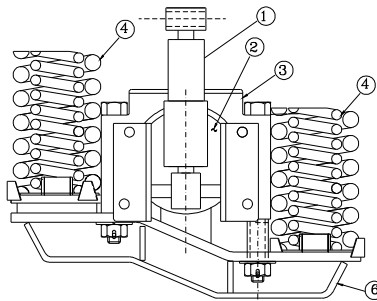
Suspension assembly,1-damper;2-bearing;3-adaptor; 4-Helical spring;6-spring seating.
